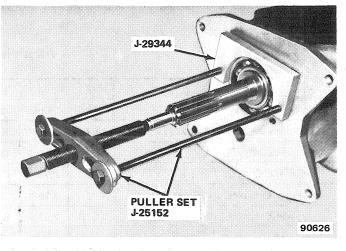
B-27 Clutch Shaft and Front Bearing Assembly
